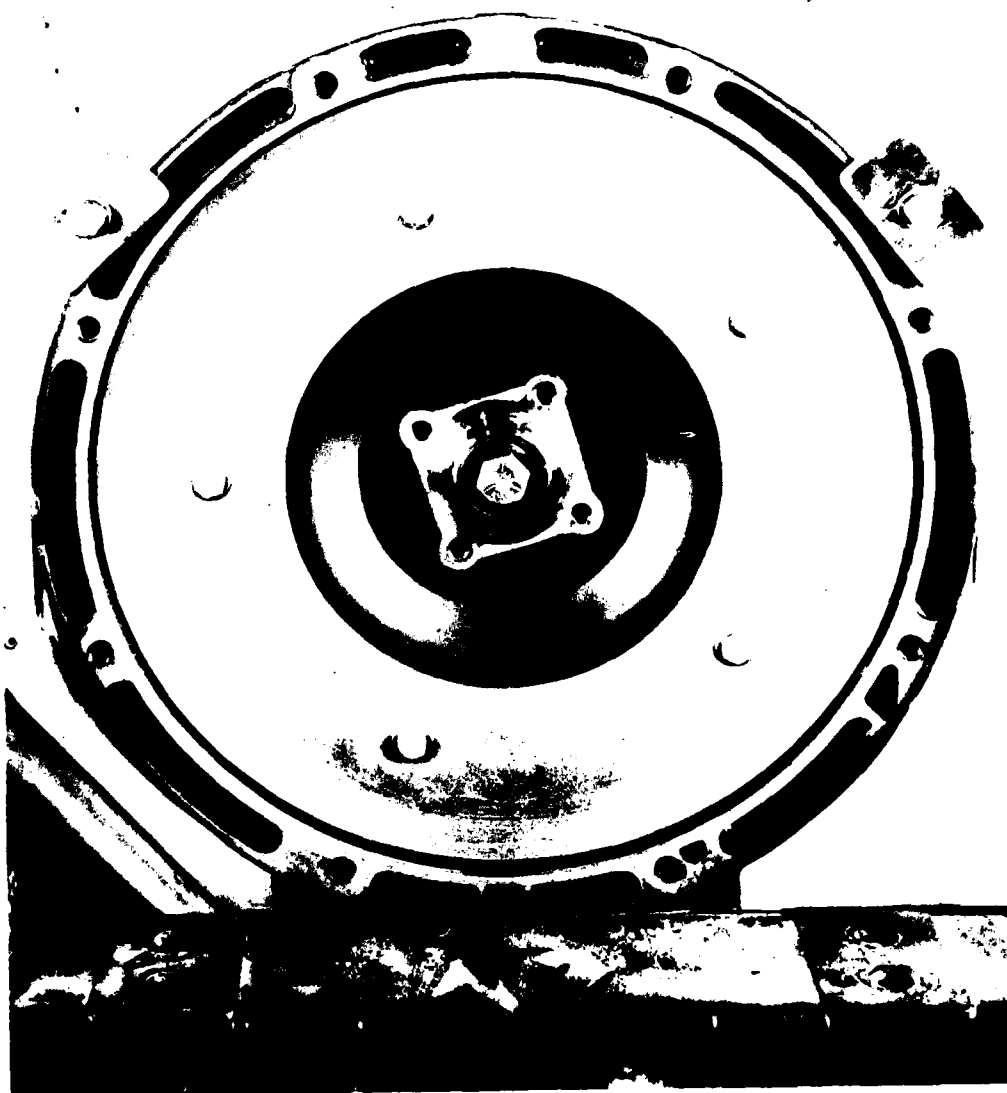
6-hp MIL STD engine with MERDC design flywheel to housing air seal plate. This plate stops leakage of hot engine air into generator cooling air discharge. Experimental modification, circa 1970.
